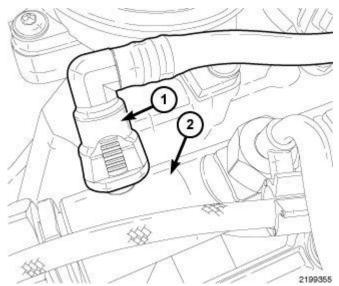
Fuel Rail & Return Line Courtesy of CHRYSLER LLC
